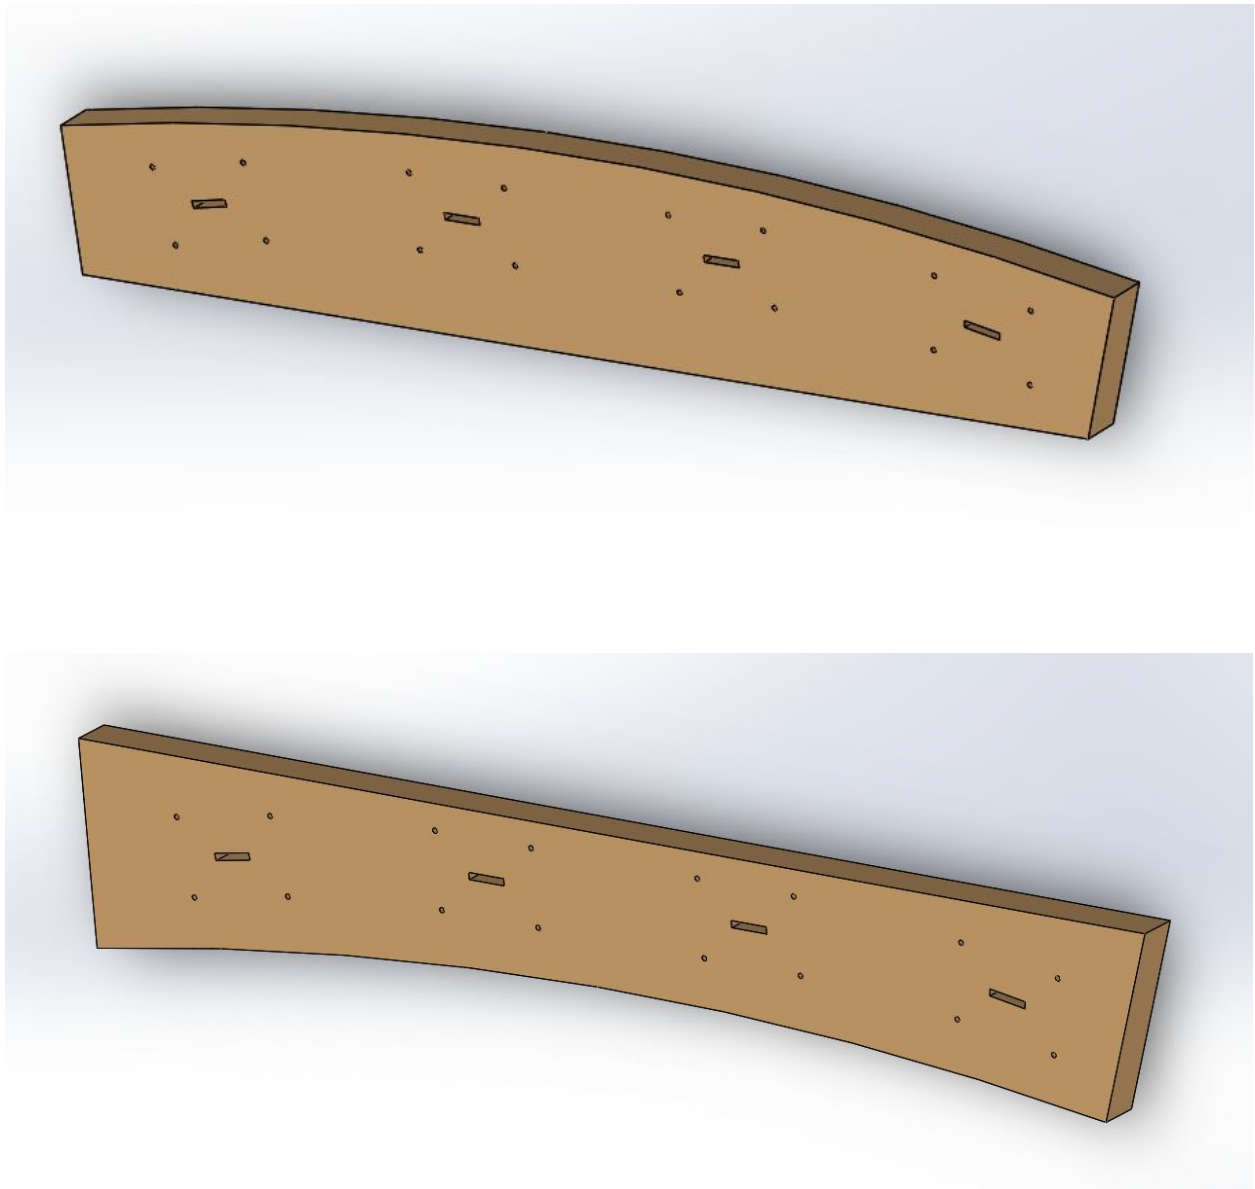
The CAD drawings above show how the track pieces have to be water jetted
